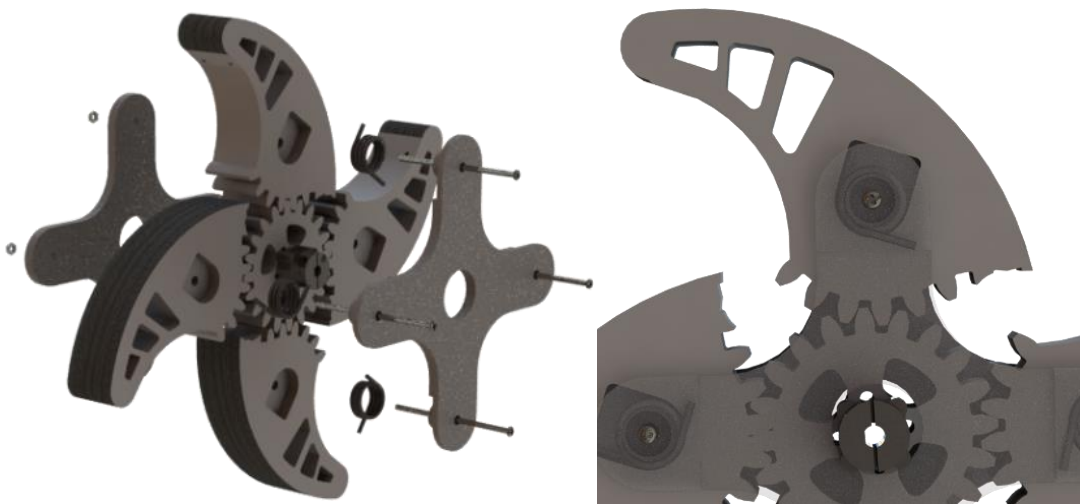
CAD of the exploded view of the assembly (left) and close-up view of the spring (right)
